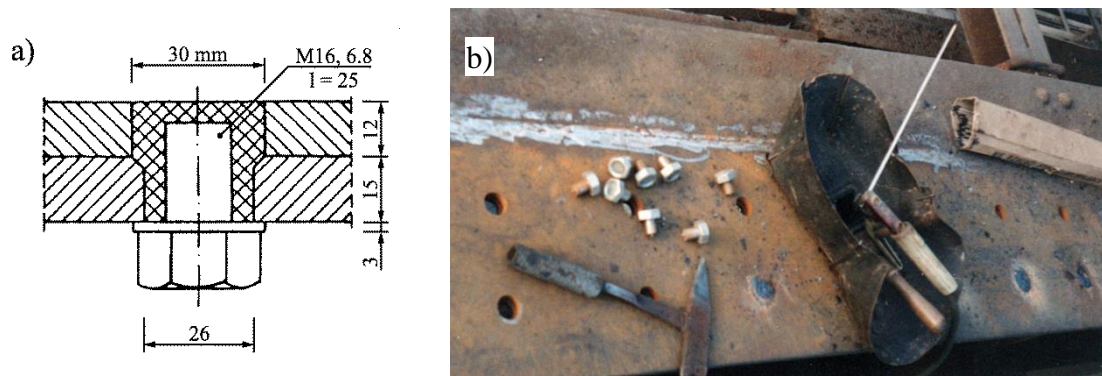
Weld studs: a) hole geometry, b) installation view
